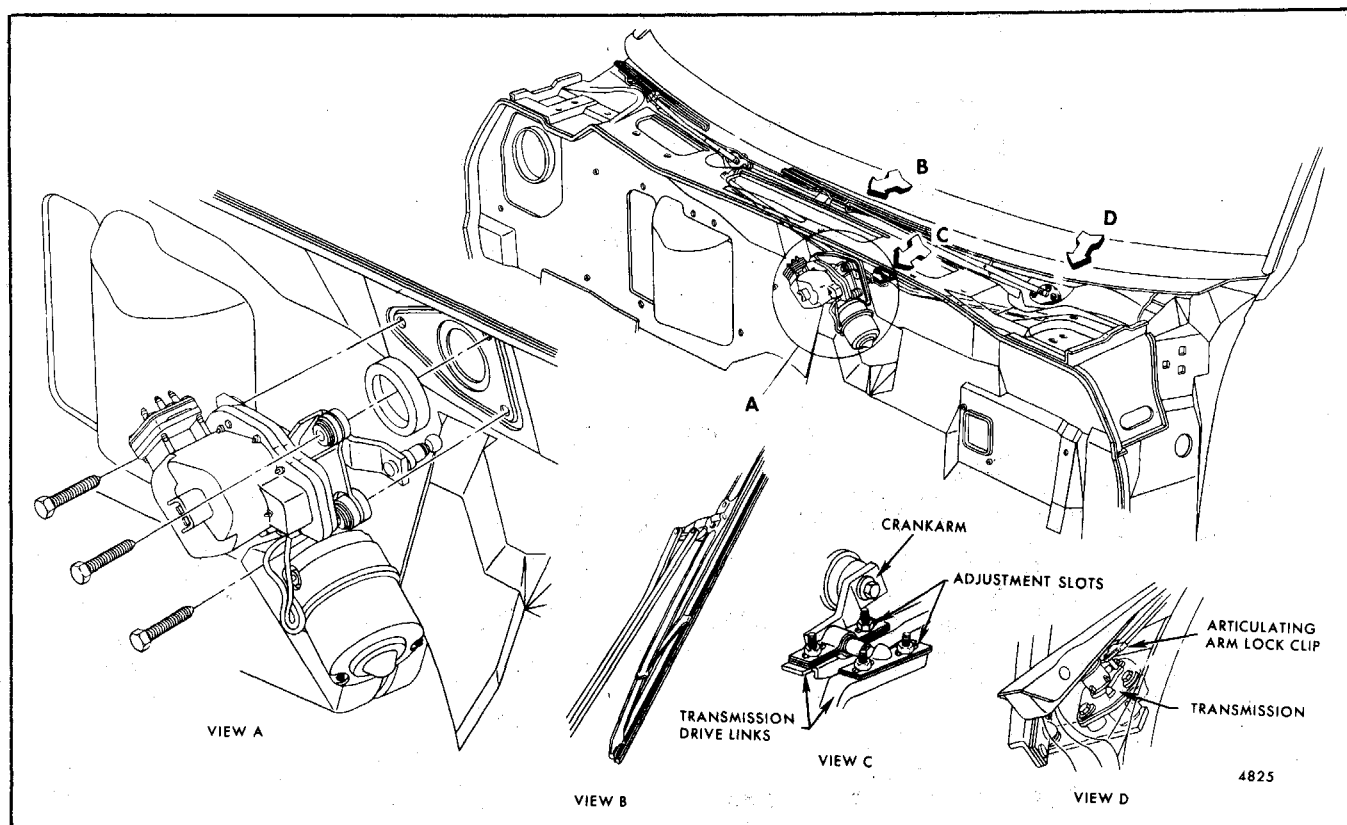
Round Motor and Transmission Installation - "E" Styles
